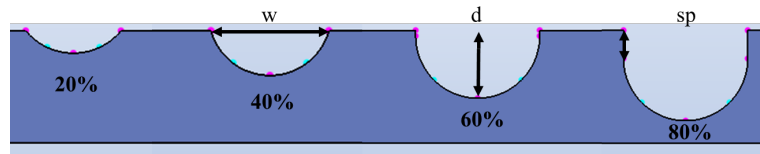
Illustration highlighting the dimension of defects cut into a 20mm thick plate with a 22mm ball end cutter.
